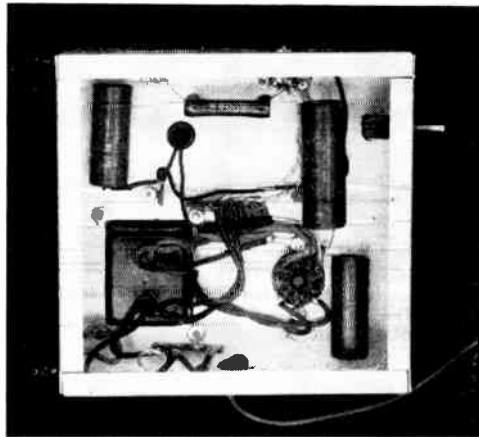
Bottom view of the simple receiver power supply showing the cut-out for the flush-mounting transformer.
